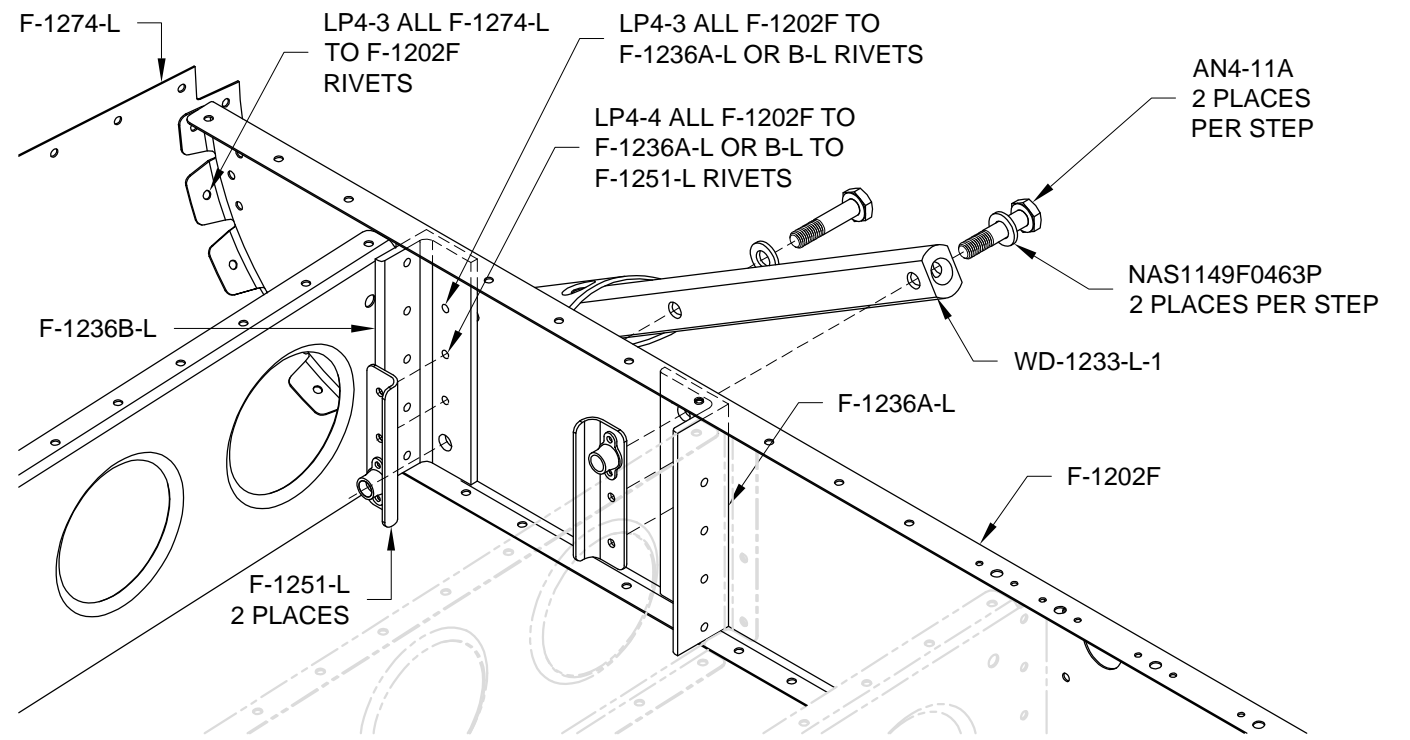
RIVETING THE STEP ATTACH ANGLES AND FUSELAGE CORNER SKINS
